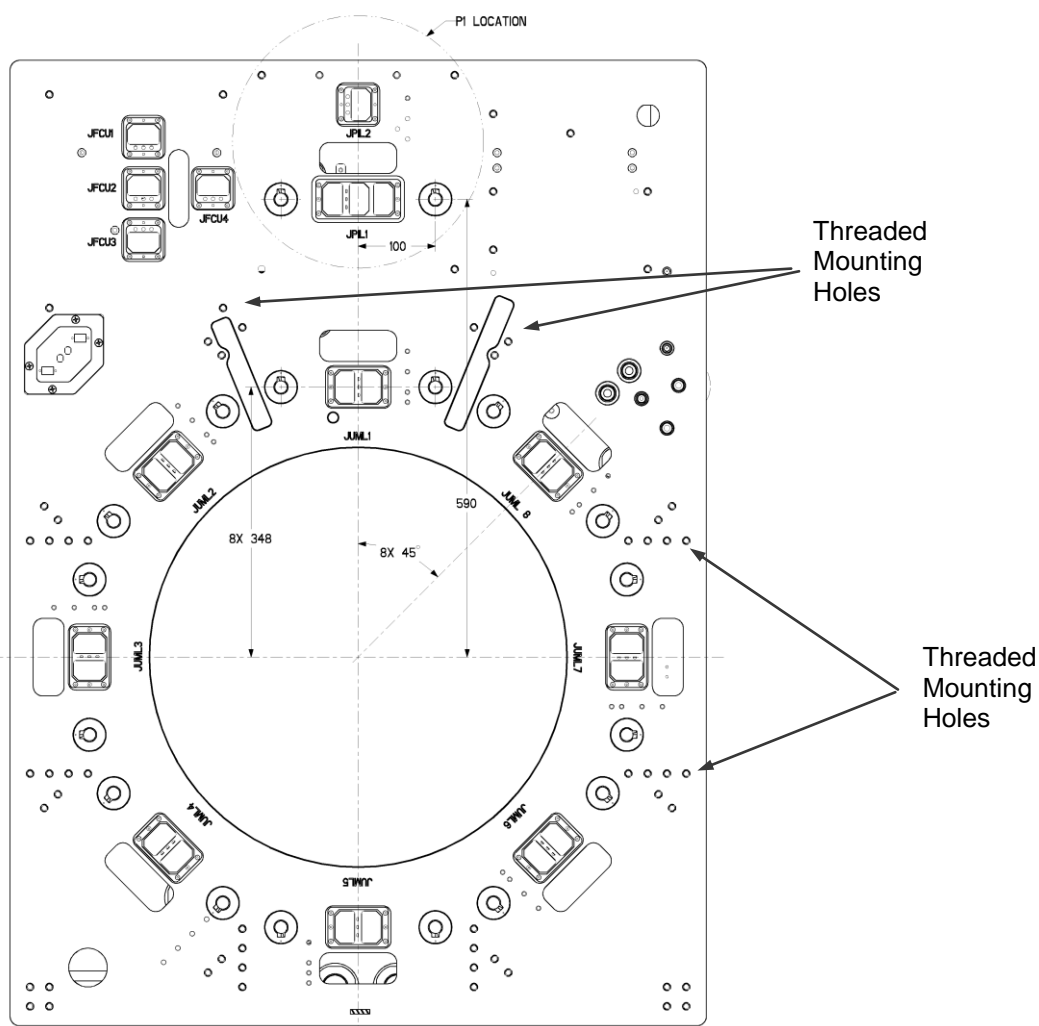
UML THREADED MOUNTING HOLE INTERFACES
